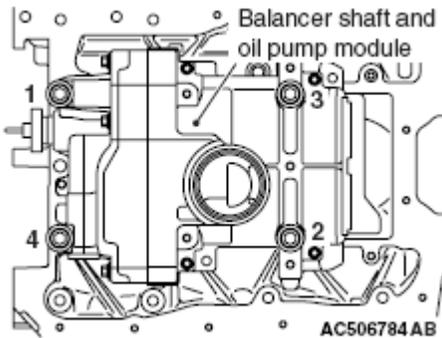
Identifying Balancer Shaft And Oil Pump Module
